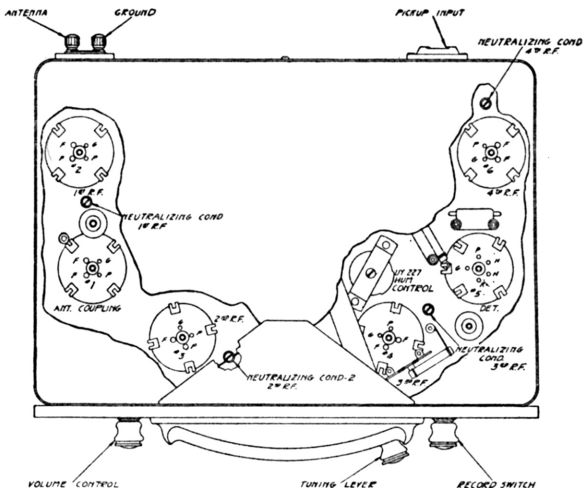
Top View of Radio, Showing Radiotron Sockets
